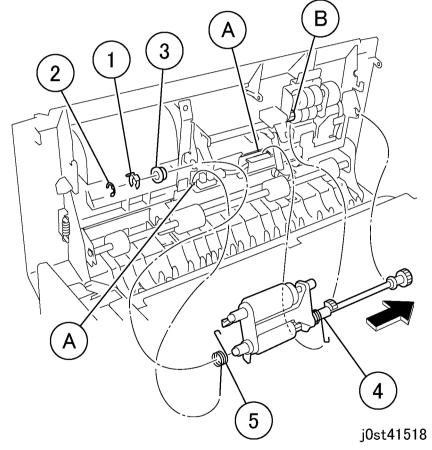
Removing the Nudger/Feed Roll Assembly (j0st41518)
